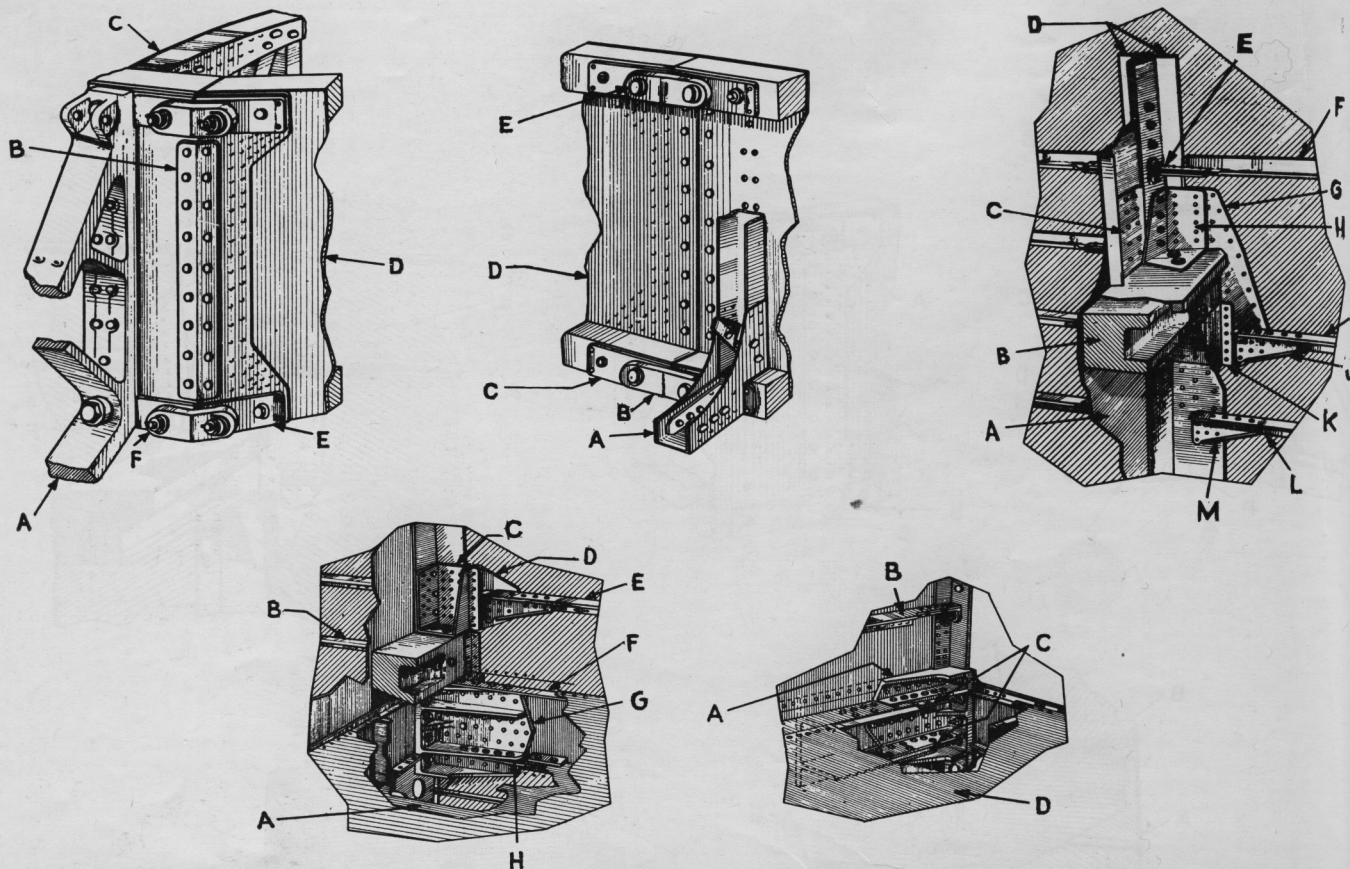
Avro Lancaster spars are built up of trapezium-shaped extruded milled booms attached by nickel chrome and steel bolts to flat web alclad plates with sloping shape of the booms conforming to the top and bottom wing curves. The sketch at the upper left shows details, looking aft, of the front spar joint at the center section and outer panel, with landing gear support beam (A); web joint plate (B); engine rib (C); outer panel spar web (D); reinforcing plate (E); and steel shackle (F). The top center sketch shows the same area, but looking forward, with engine rib (A); steel shackle (B); reinforcing plate (C); outer panel spar web (D); and boom joint pin (E). The sketch at the upper right is the joint of the top front spar boom to the fuselage, with spar web (A); boom (B); web joint plate (C); fuselage formers (D); stringer attachment angle (E); stringer (F); gusset plate (G); shoe plate (H); stringer (I); stringer bracket (J); stringer bracket (K); and stringer and stringer bracket (L) and (M), respectively. The lower left sketch shows the lower boom-to-fuselage joint, looking forward, with floor bottom (A); stringer (B); shoe plate (C); gusset plate (D); stringer (E); fuselage longeron (F); longeron bracket (G); and strap plate (H). Lower right is the same looking aft, with longeron bracket (A); stringer (B); strap plates (C); and floor top (D).
